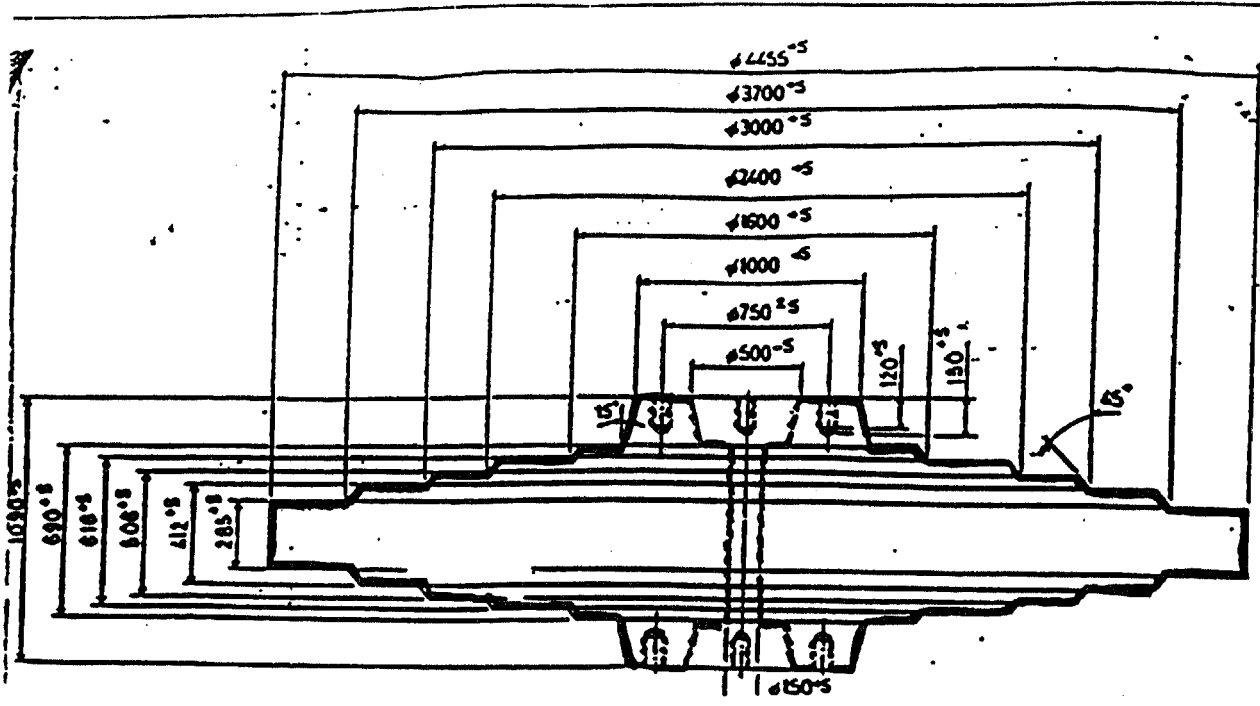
CROSS SECTION OF PRE-MACHINED CORE FOR 1200 MM DOUBLE POLE MAGNETS
